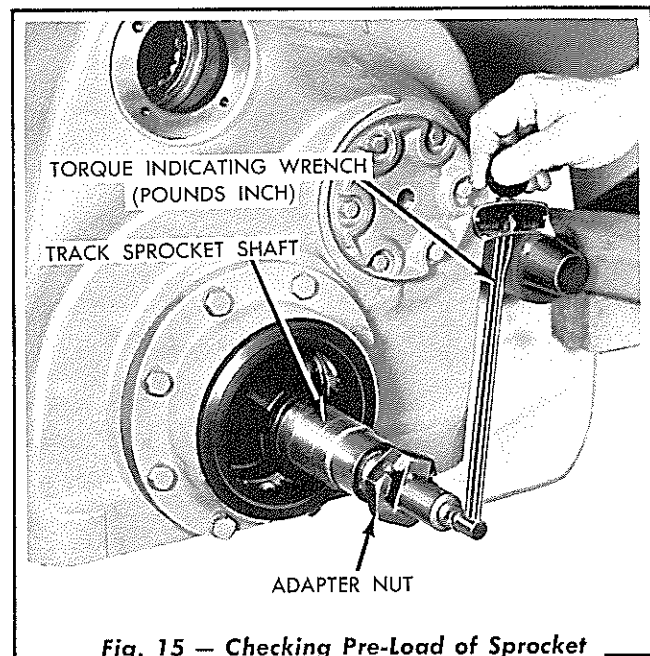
Checking Pre-Load of Sprocket Shaft Bearings
